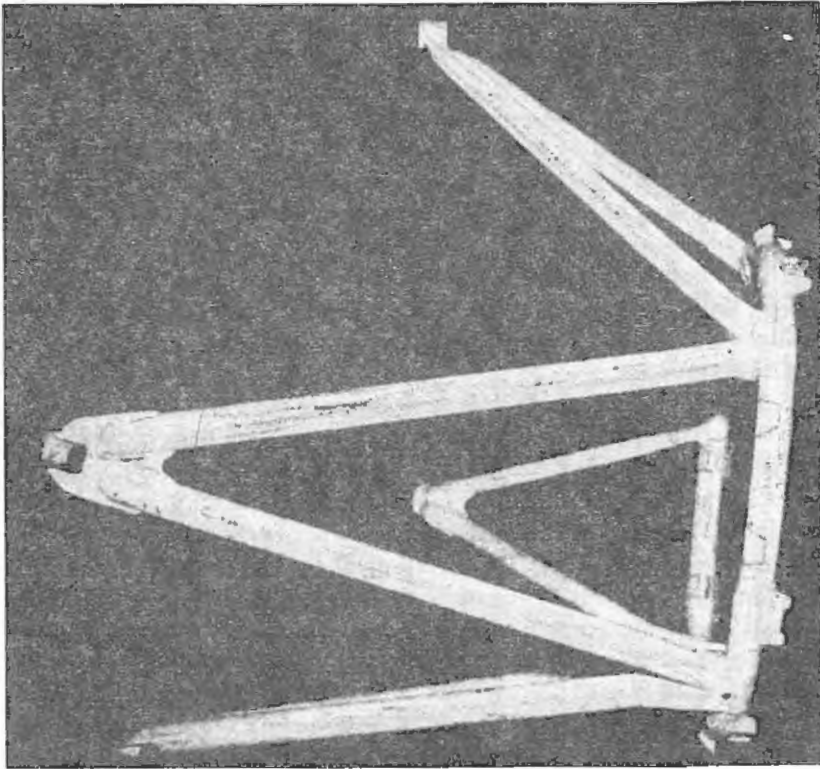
Engine Mount: Chrome-molybdenum Sheet, Tubing, and Forgings
